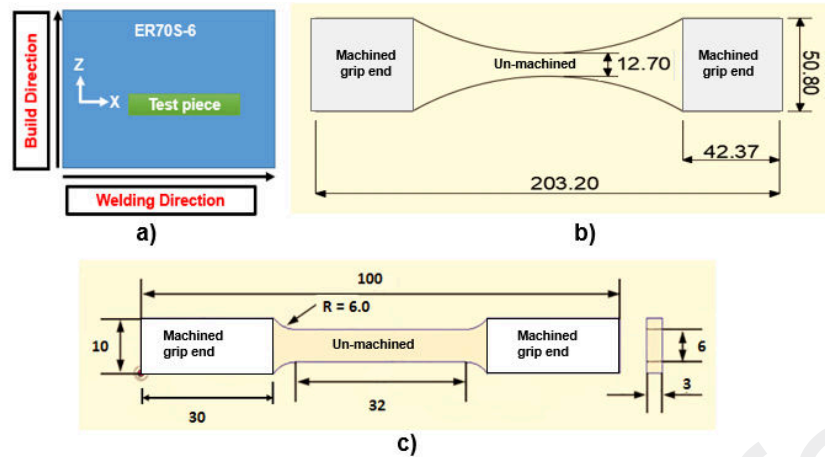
(a) Build orientation (b) fatigue testing geometry (c) tensile testing geometry
